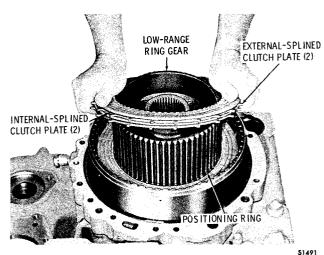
Installing high-range clutch plates (-3 underdrive model)
